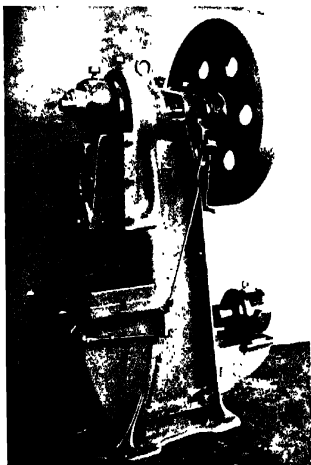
End-wheel type of press, which gives a rigid style of frame (Schuler)
